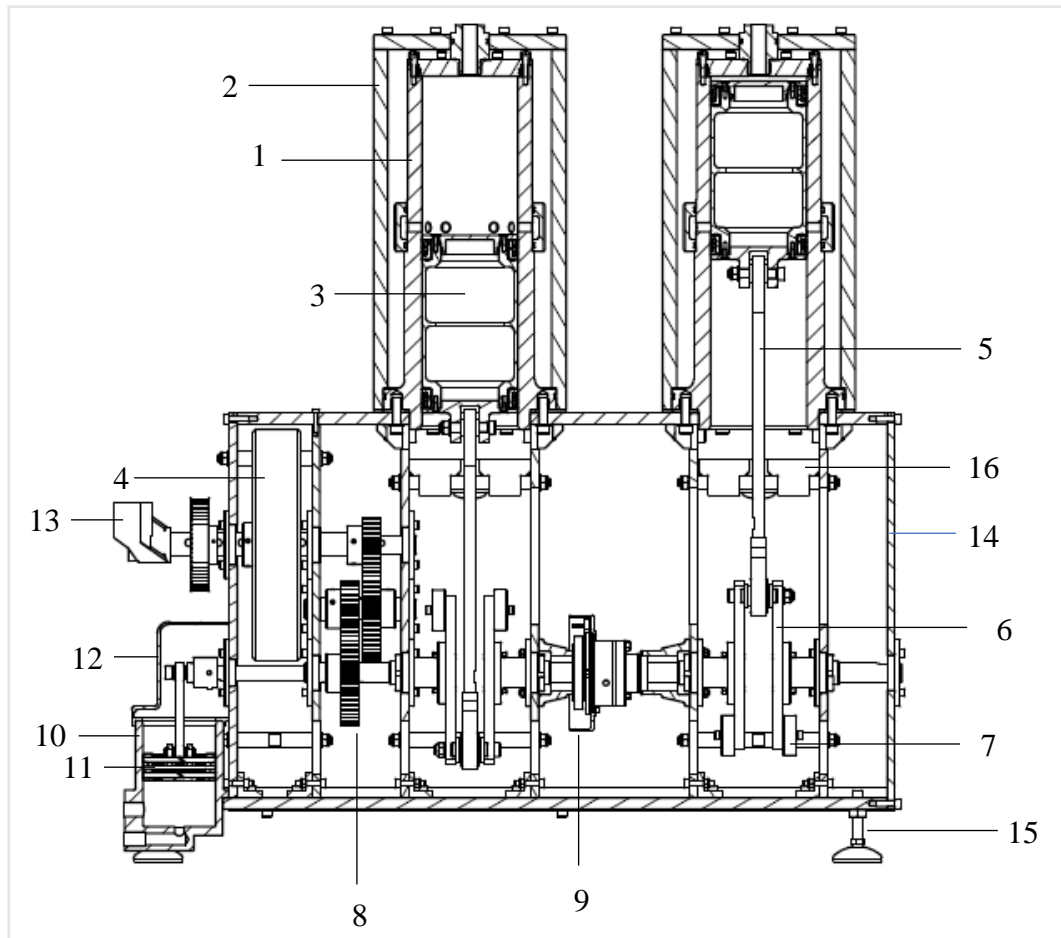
Engine CAD front view with partial section (CAD by UoS)
